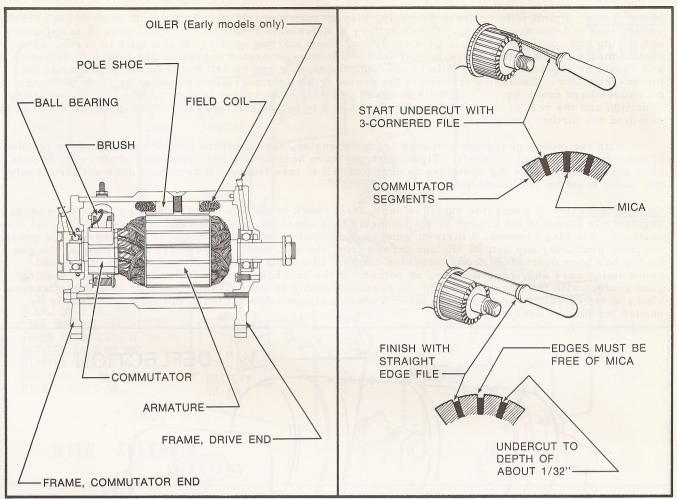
MOTOR-GENERATOR, CUTAWAY VIEW
